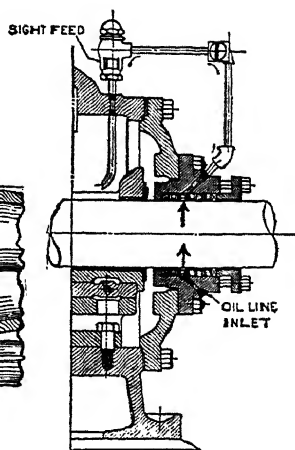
Sectional view of stuffing box for metallic packing and oil connections to lantern.
